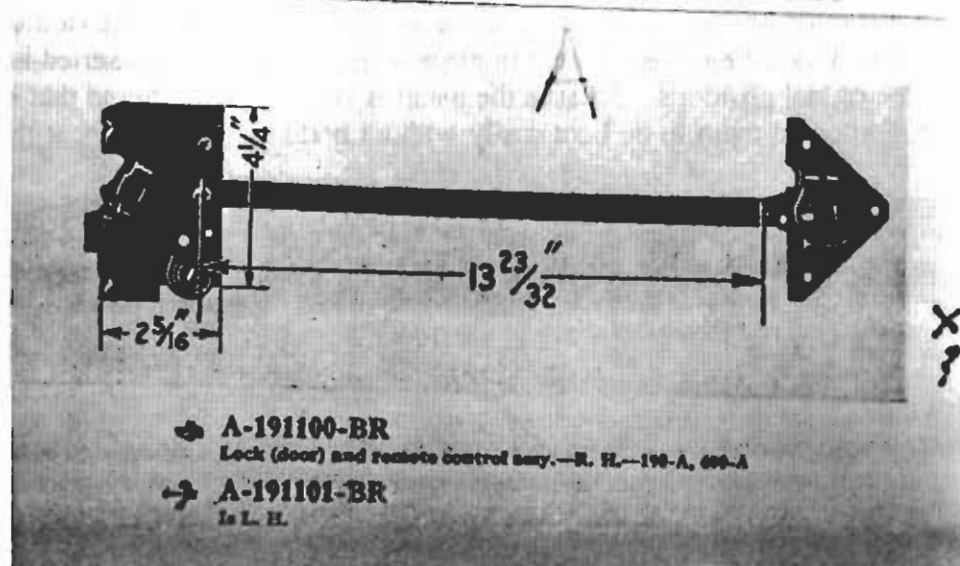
Ford drawing of Locks and Remote Control with dimensions as depicted in The Automotive Hardware and Trimming Supplies Manual 1928-1938
